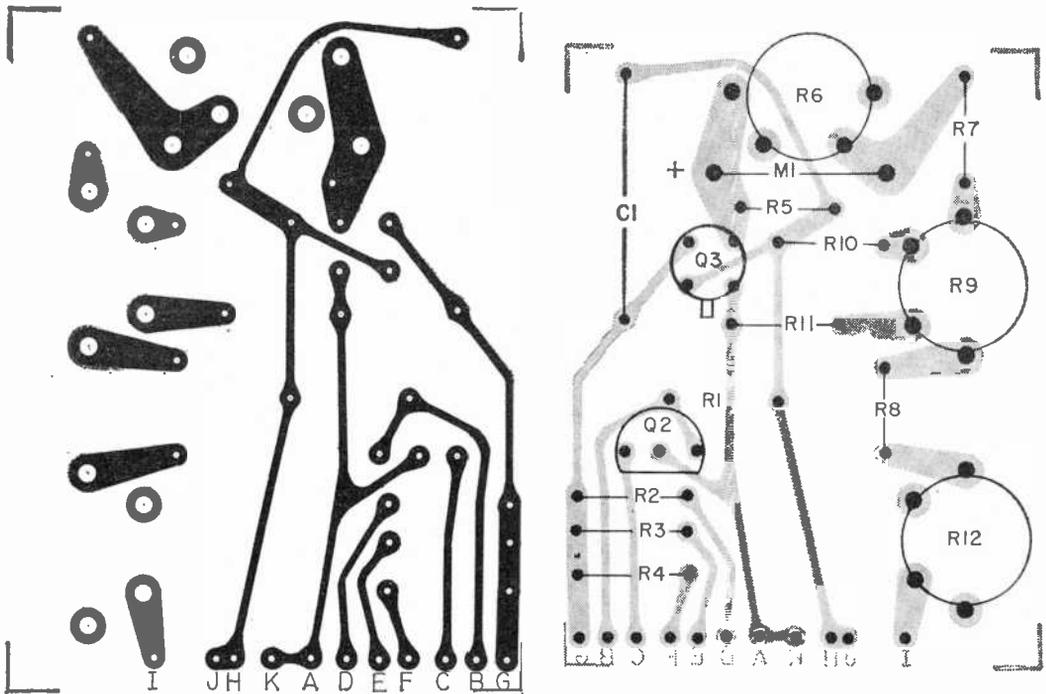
Make printed circuit board using the actual size foil pattern at left. Install components as shown at right. Board is supported directly on meter terminals and should be drilled accordingly. Alter layout if potentiometers in Parts List are not used.
